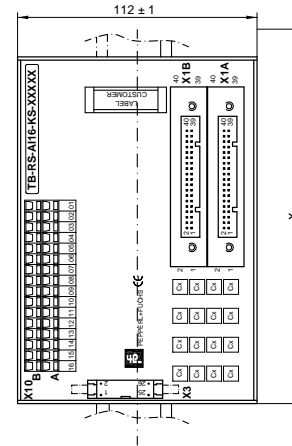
Installations instructions Termination Boards TB-XXX-..., Step 1
